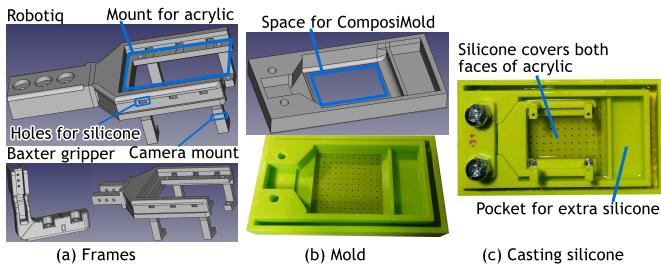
(a) CAD of frames for Baxter electric parallel gripper and Robotiq gripper. (b) Mold for silicone casting. (c) After pouring silicone into the mold.
